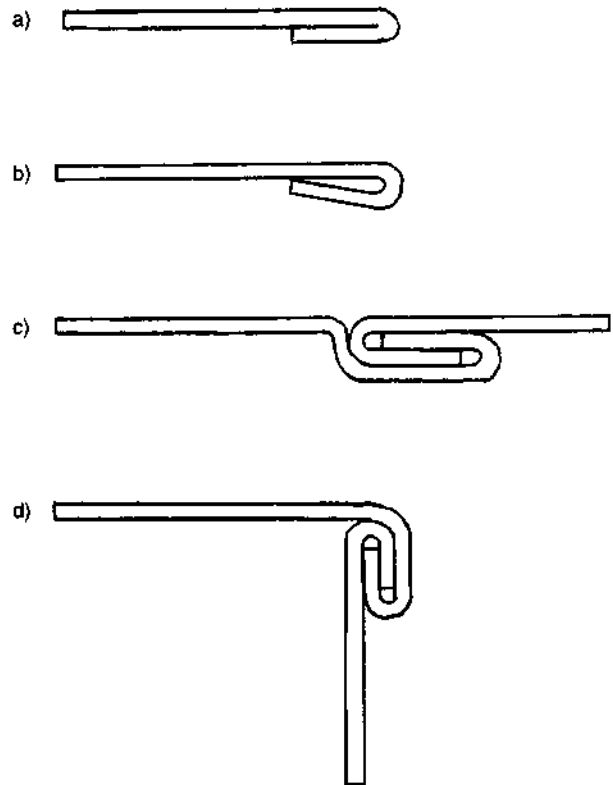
D10 Hems, a) and b), and seams, c) and d), on sheet metal parts. Seams are formed by interlocking hems on the edges of two sheets.
